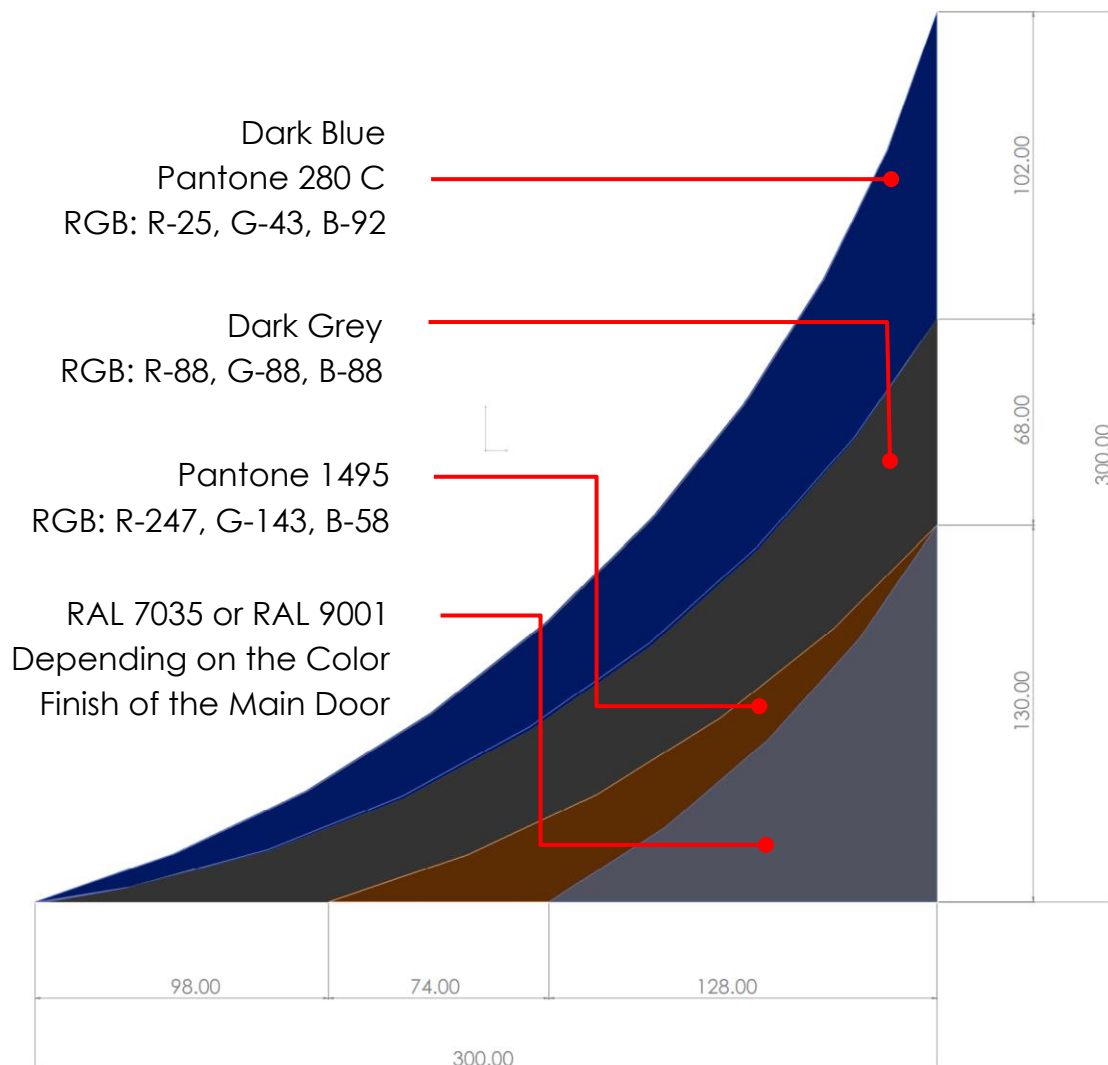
Detail Drawing of SEC Standard Graphic Theme (SEC Branding) for Single and Remote Meterboxes with Steel Enclosures
